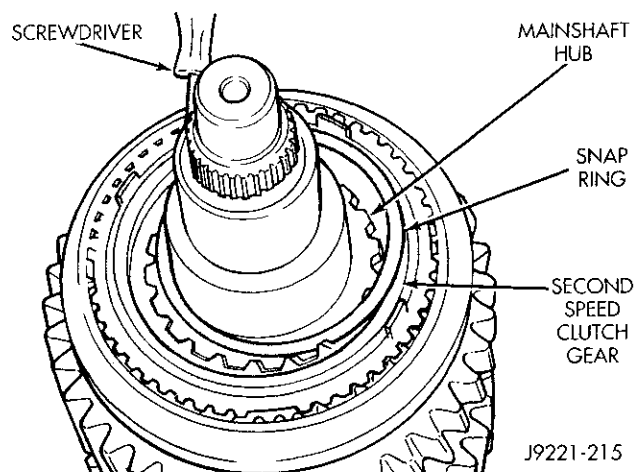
Installing Second Speed Clutch Gear Snap Ring
